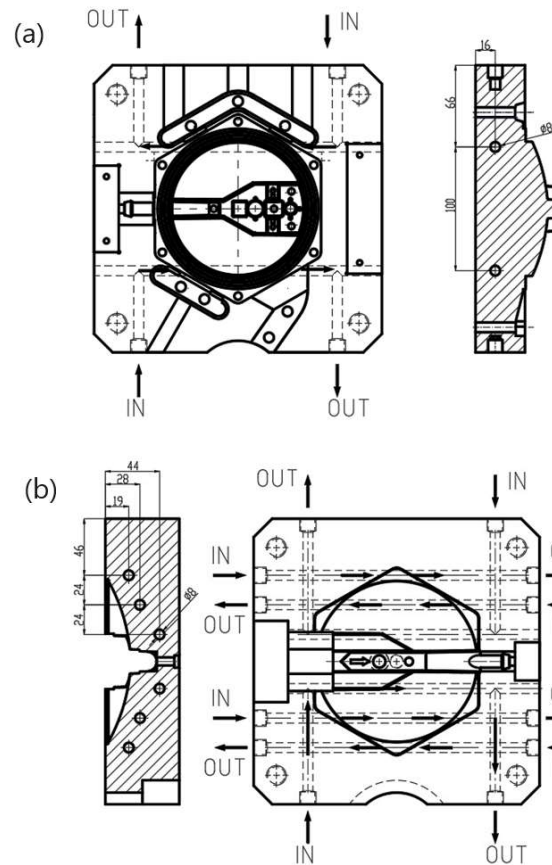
Cooling system: (a) insert core; (b) insert cavity
